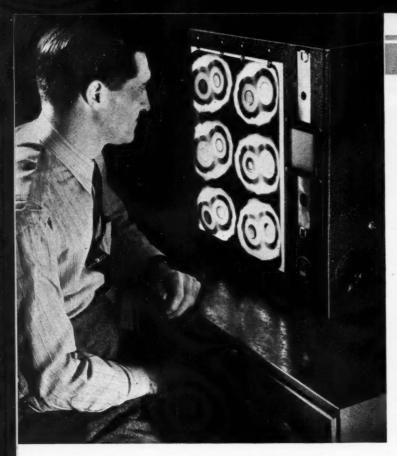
All Castings Used in Producing Precision Gear Pumps are X-rayed to Detect Porosity and Other Defects before Machining
